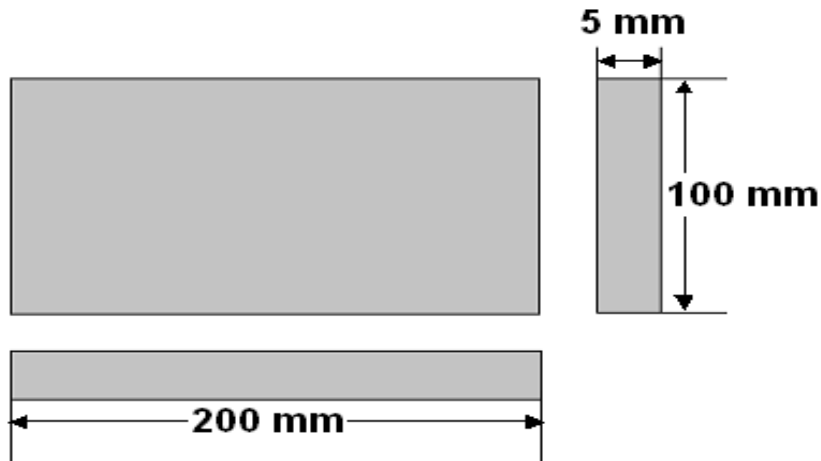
The Dimensions of Workpiece used High-Speed Milling
